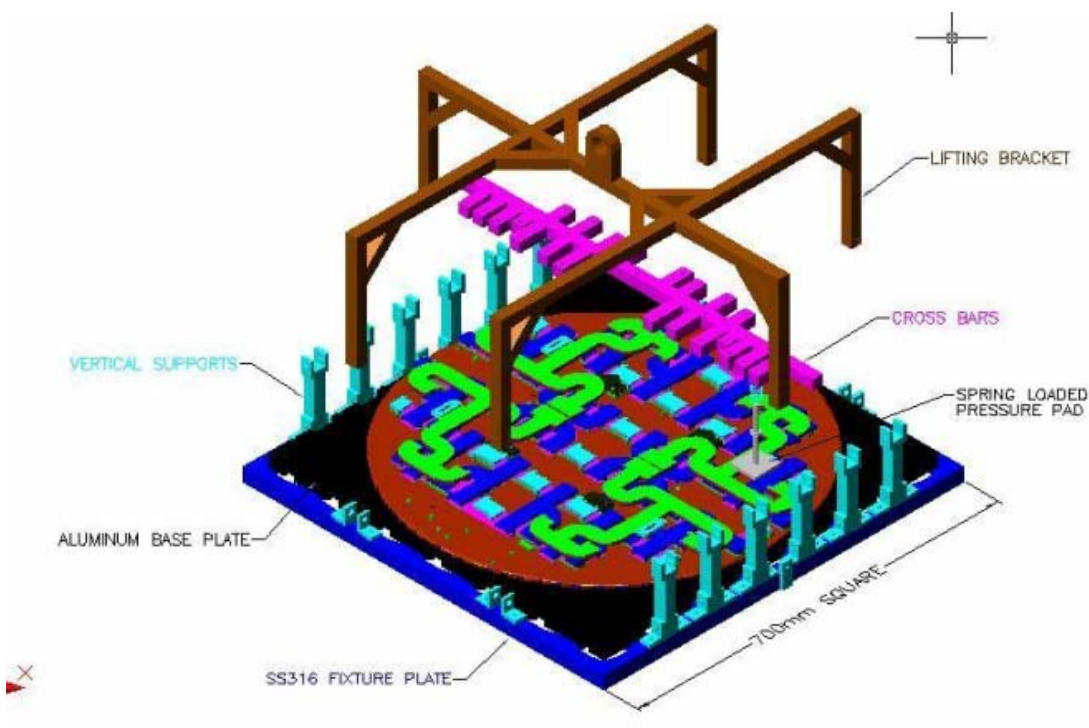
3 ANTENNA ASSEMBLY IN THE DIP BRAZING FIXTURE
